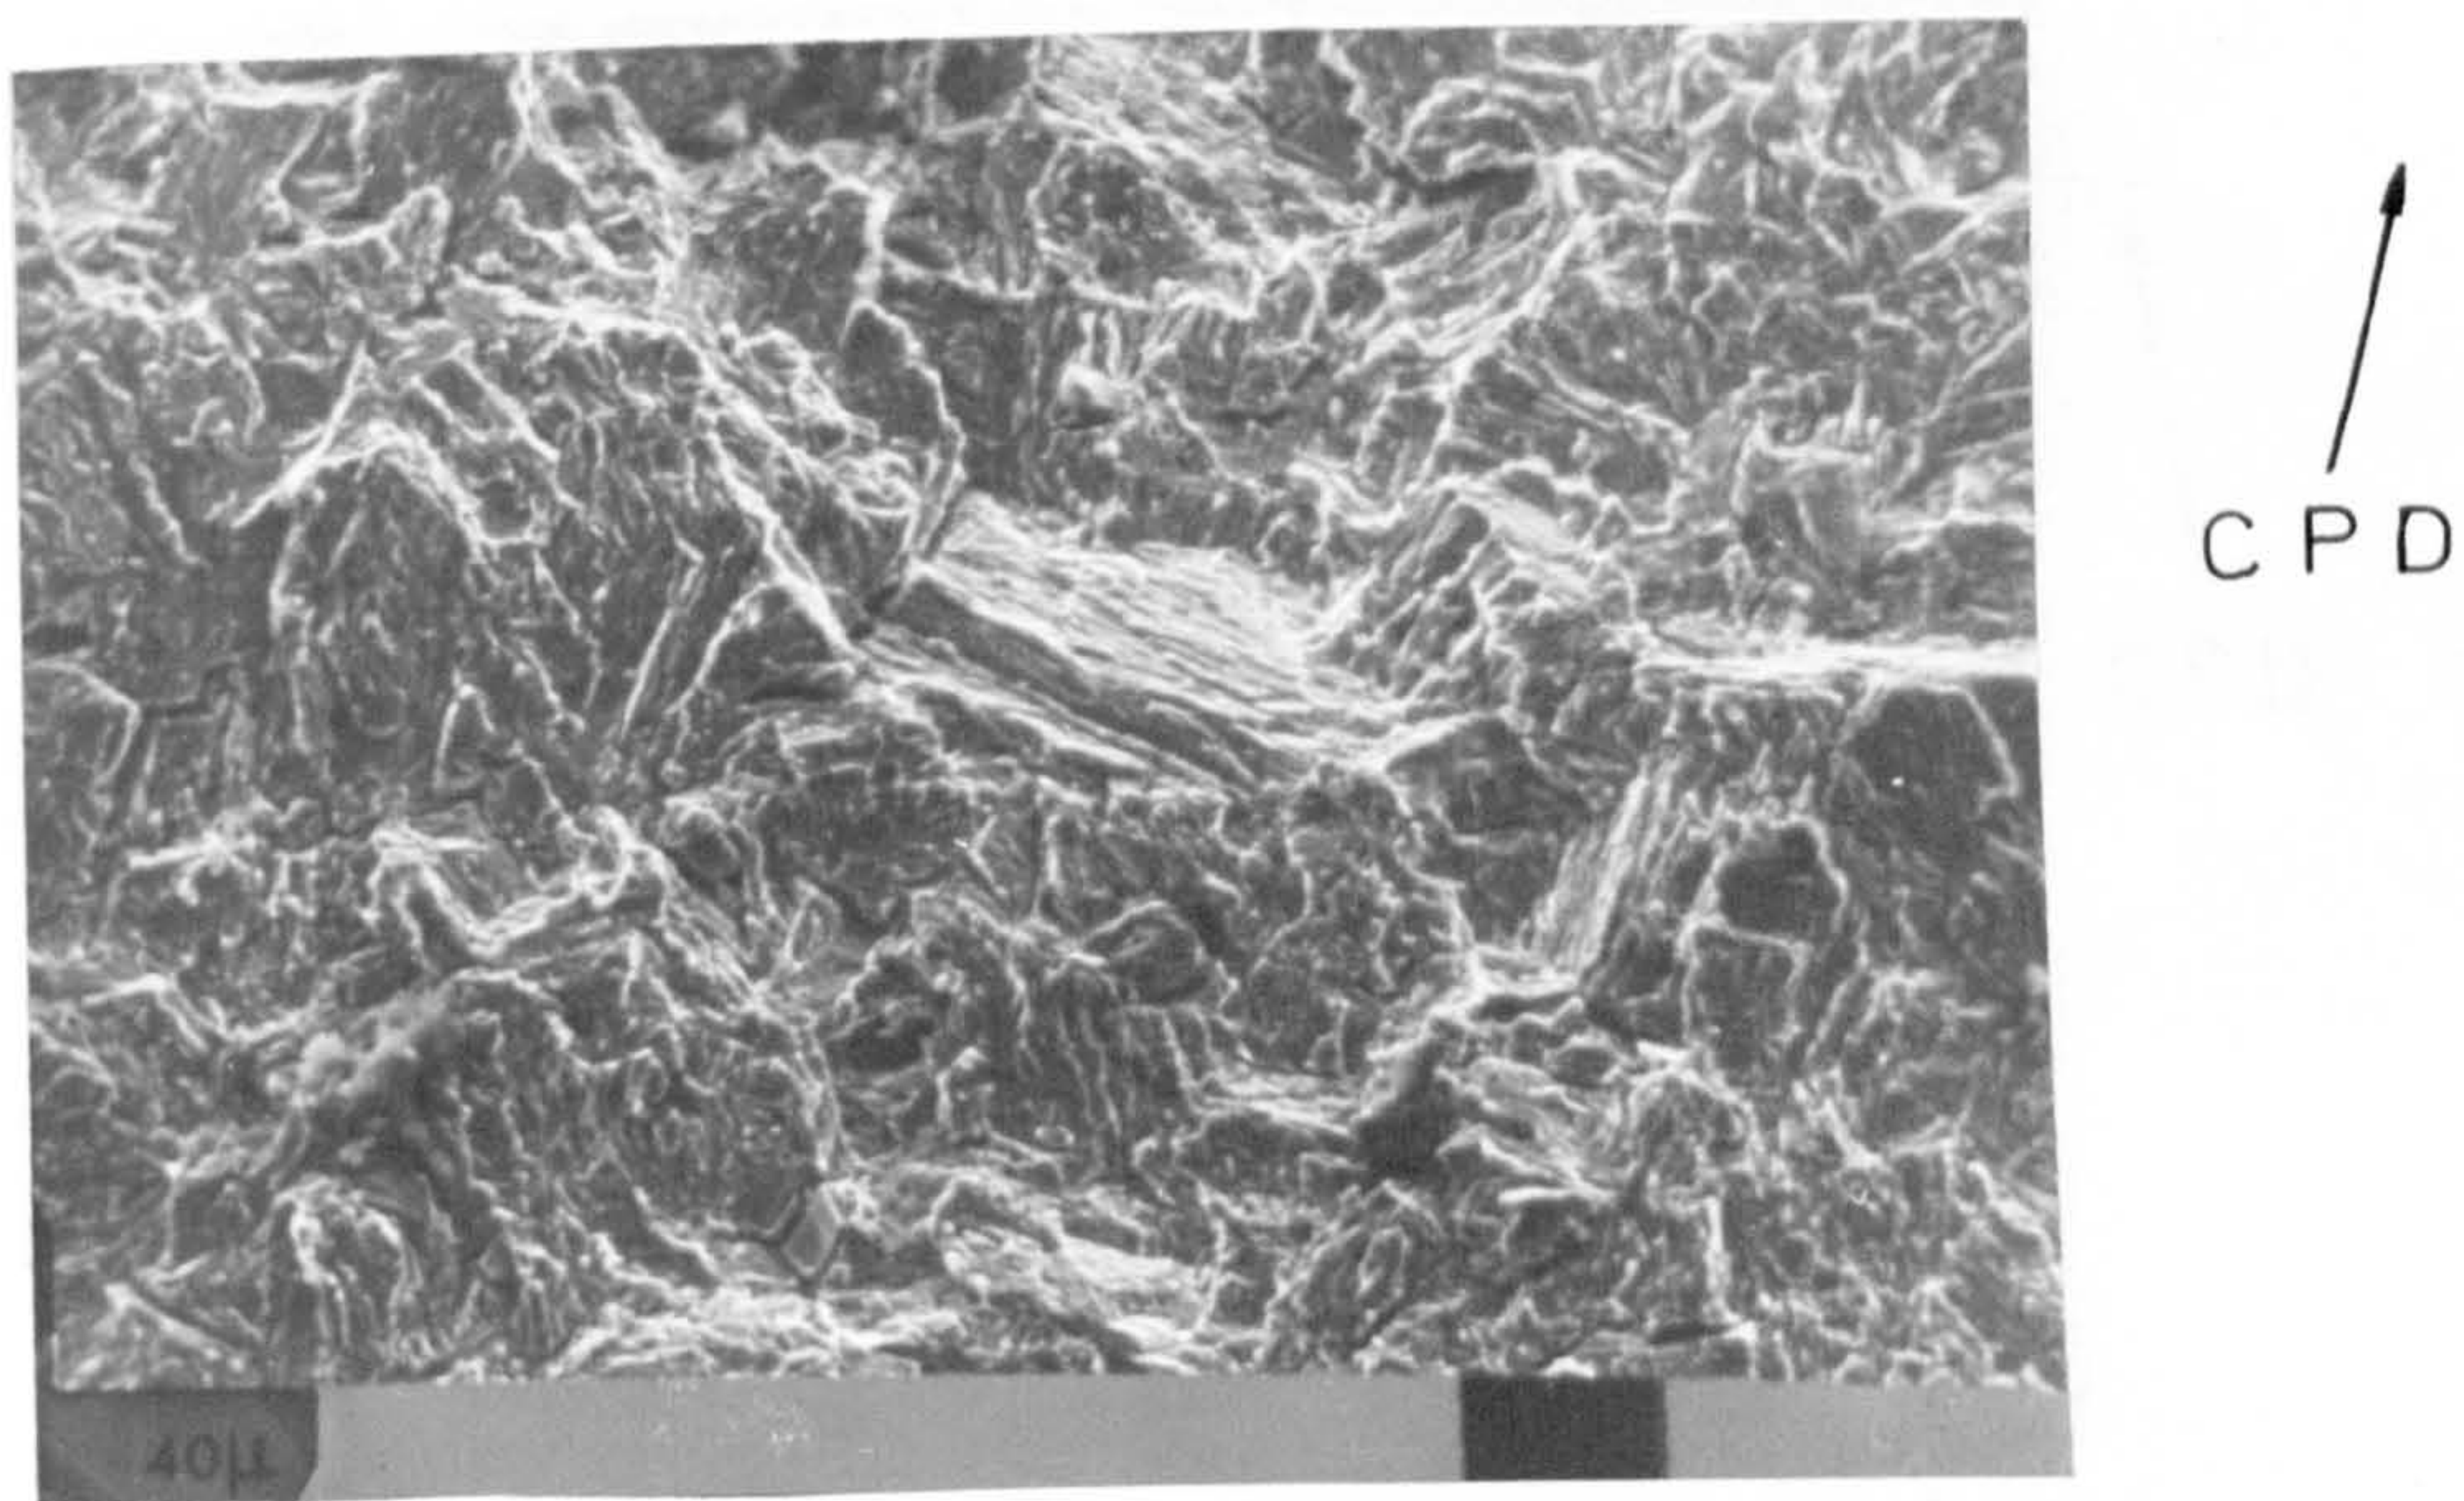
Fracture surface of parent plate specimen, -1400 mV (S.C.E), crack side covered ($\Delta K = 24.5 \text{ MPa}\sqrt{\text{m}}$)
